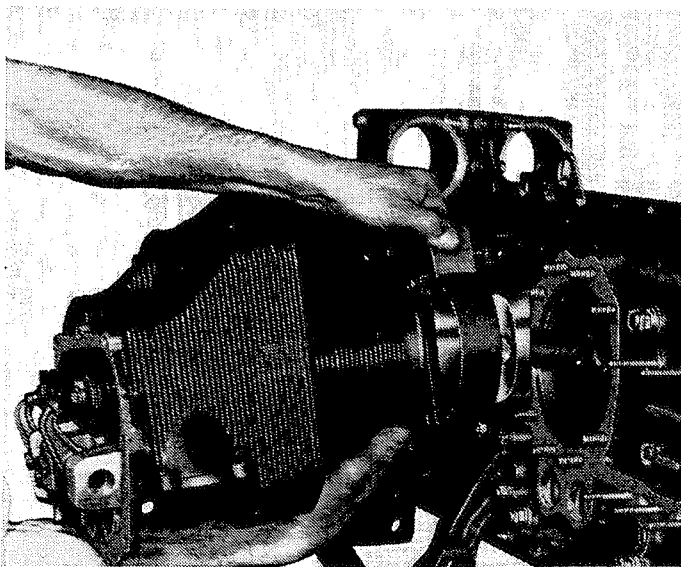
A. INSTALLING NO. 6 CYLINDER.
